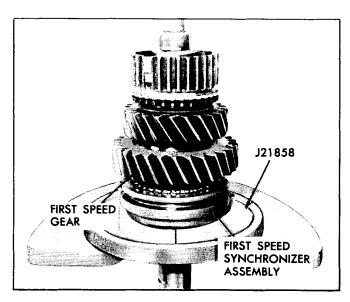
A-30 Installing 1st Speed Gear and Synchronizer Assembly
